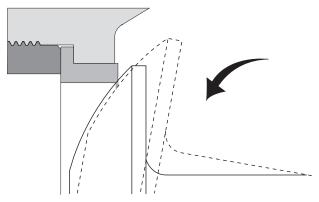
Seating path of eccentric plug design. (*Courtesy of Sereg/Valtek International*)
